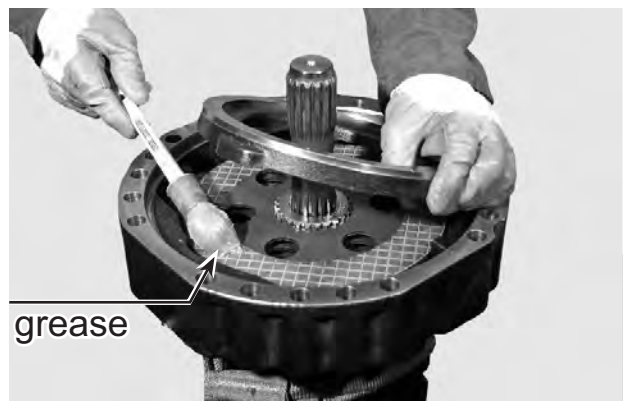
Insert the intermediate disk (1). Before installing the last brake disc and the intermediate disc, spread grease over the contact surfaces to hold them in position while mounting on the central housing.
